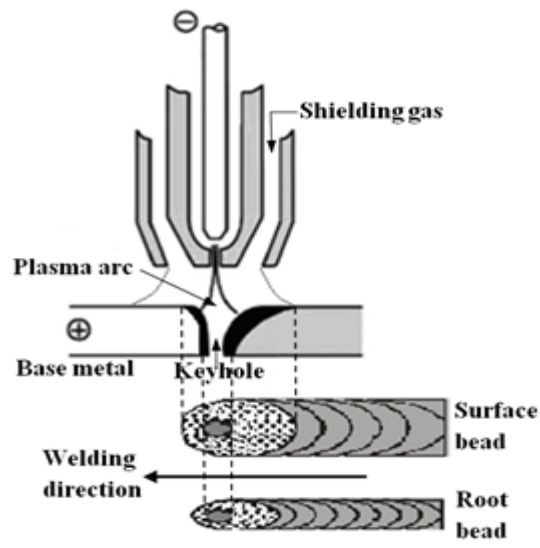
Keyhole Plasma Arc Welding Technique
